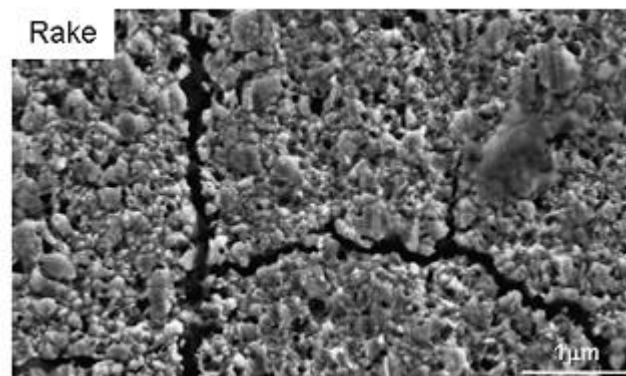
Crack in the TiSiN coating during high speed machining of 16MnCr5 hardened steel [34].
